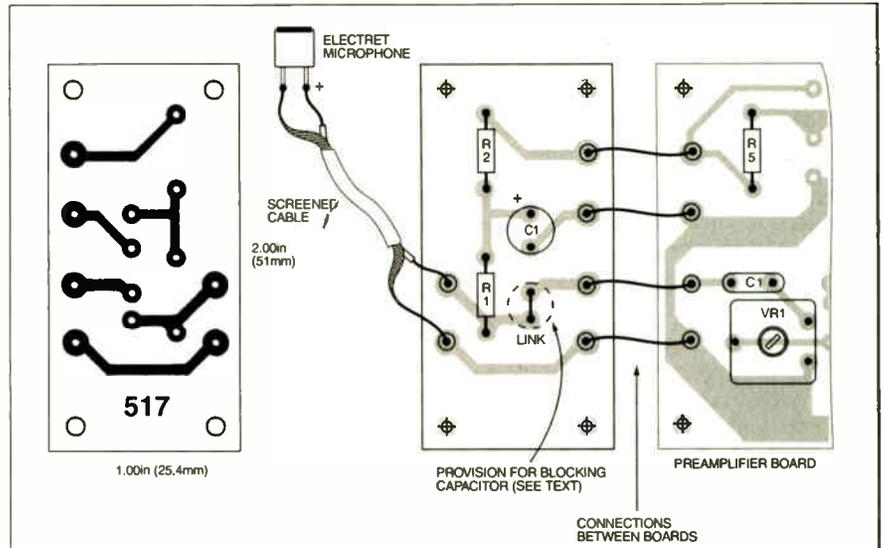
Printed circuit board layout, copper foil master and wiring to the Electret Mic. board
